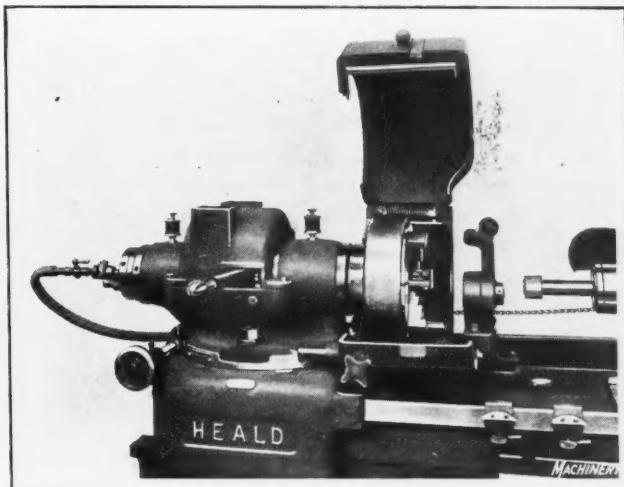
Swinging Guard with which the Work-head of the Heald Grinder is now equipped
